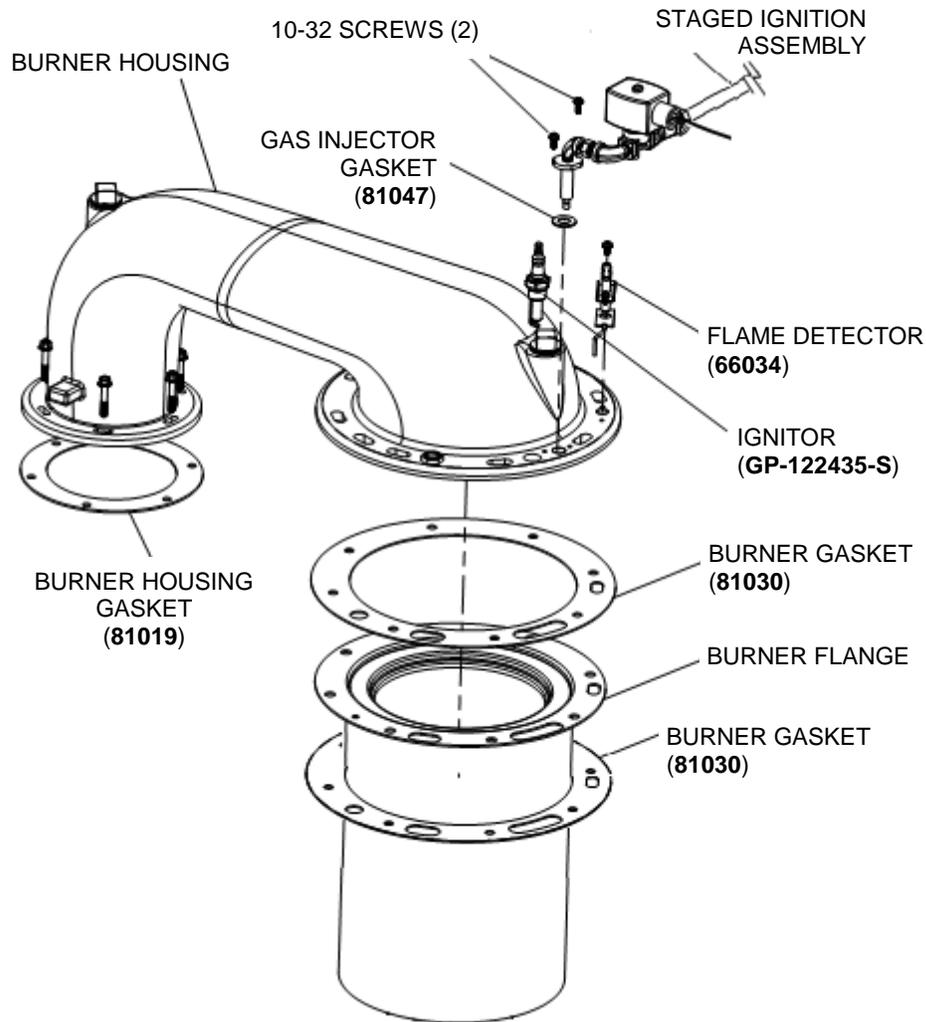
Benchmark 3.0LN Burner Disassembly - Top View
